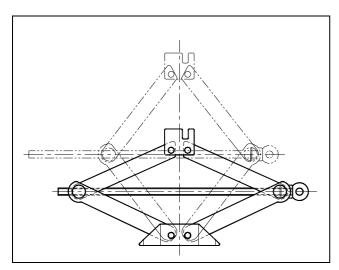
Detail from CAD drawing by student, John Murdoch, 2006
